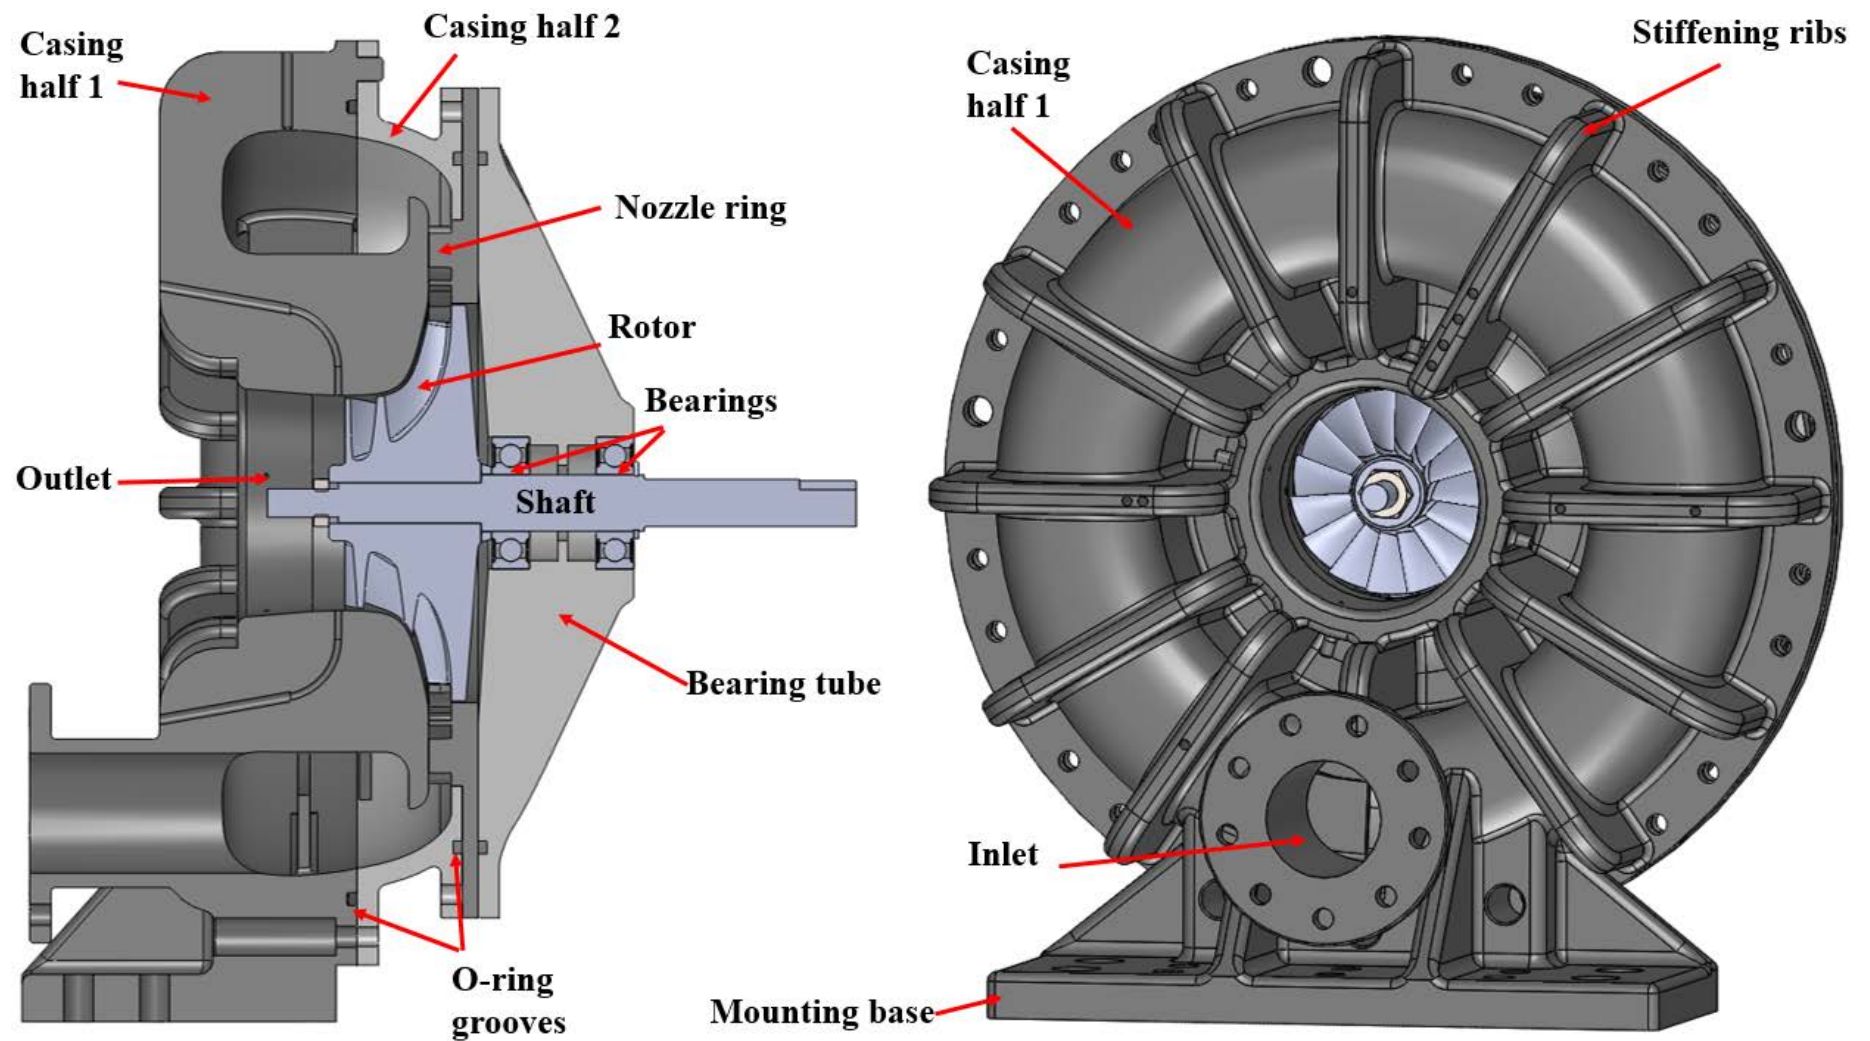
CAD model of the complete turbine assembly, (left) section view, (right) isometric view
